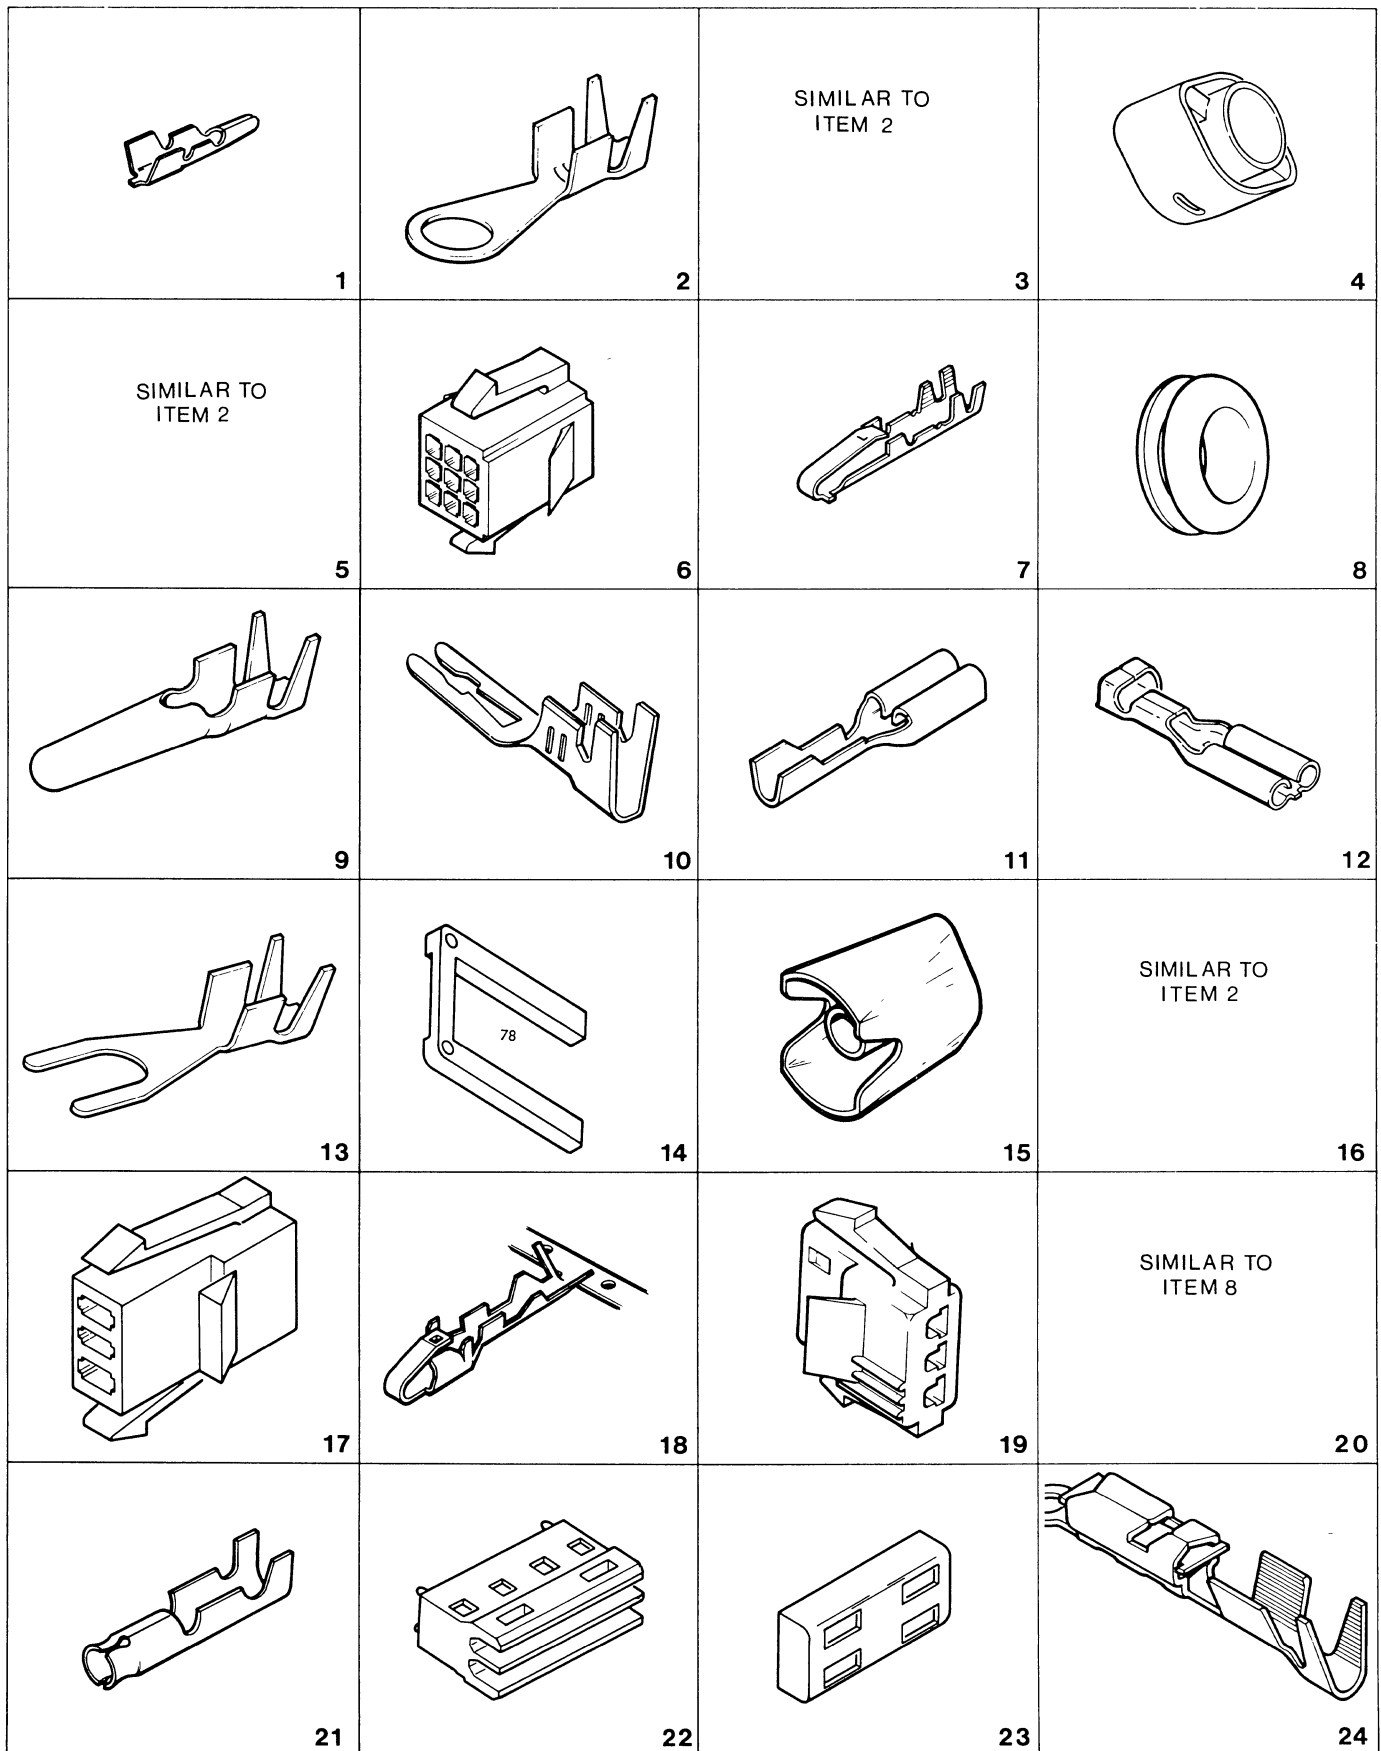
CABLE AND JUMPER ASSEMBLY COMPONENT PARTS (PART 1 OF 2)
